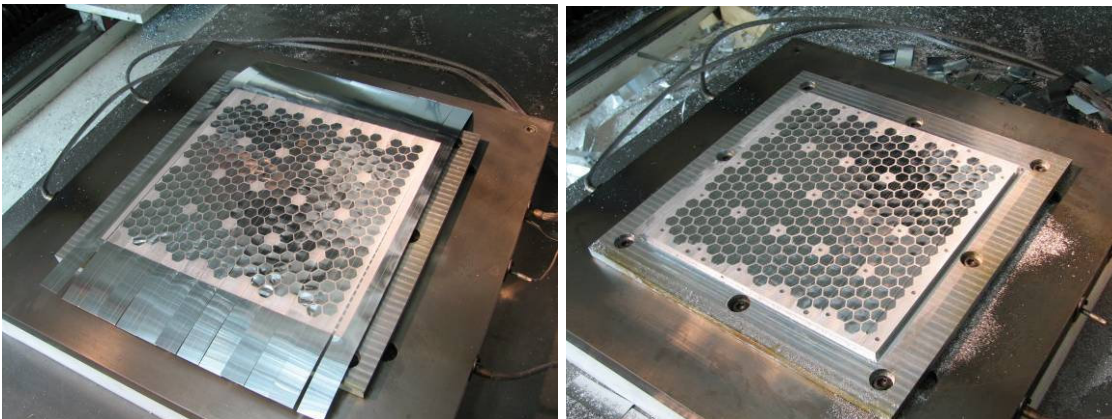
a) First layer of top facing consolidated on honeycomb core, b) Prototype deck panel with bolt pattern milled out.
